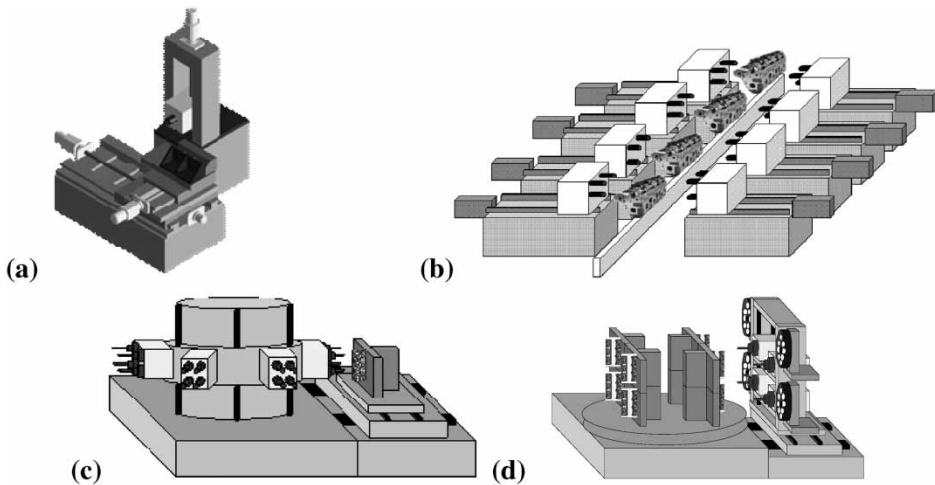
Four major machine tool options: (a) single-spindle CNC machine, (b) dedicated transfer machine, (c) head changer and (d) multi-spindle CNC machine.
